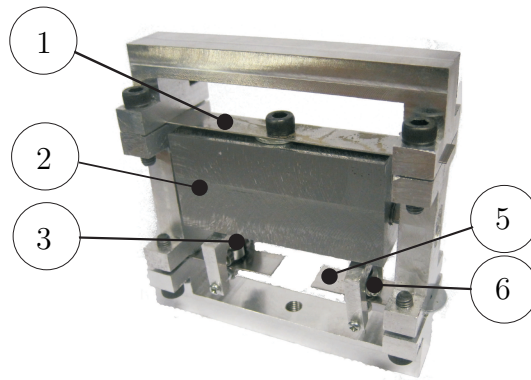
Prototype A2.1 was manufactured and assembled.
